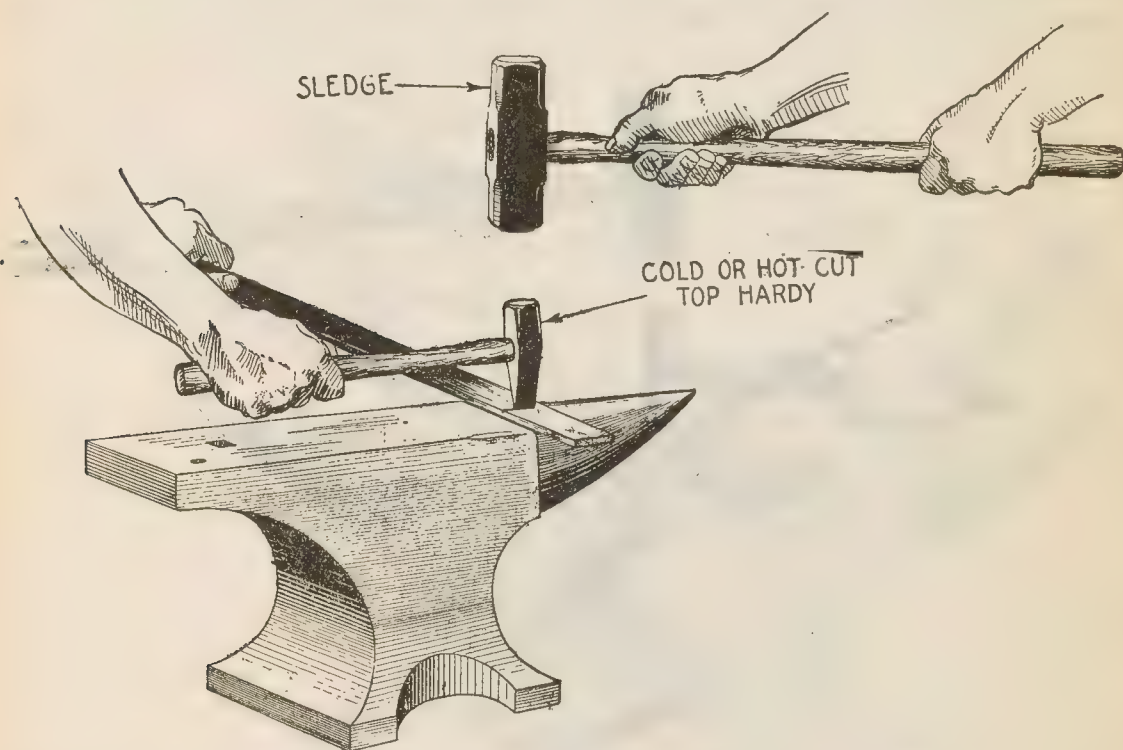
,945.—*Cutting 2.* With cold or hot cut top hardy (light cutting). Place the piece to be cut on the cutting face of the anvil. Hold piece with one hand and top hardy with the other. Place hardy squarely across piece to be cut and nick or deeply cut by blows delivered by helper with sledges. This operation is performed on the cutting face rather than the hardened face because the former is soft and in case the last blow severs the piece being cut, it would not result in injury to the tool or anvil as would perhaps happen on the hardened face. A good smith is very careful about marring the hardened face, as good work cannot be done unless this face be in perfect condition.
